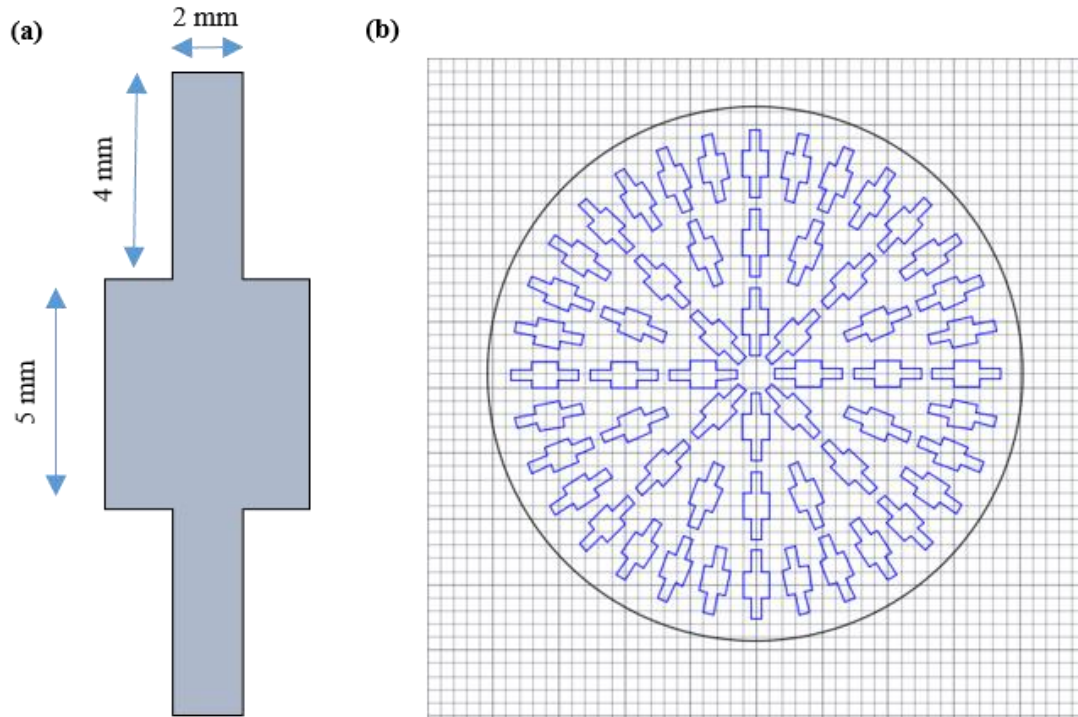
(a) Dimensions of the PDMS cantilever. (b) The laser engraving pattern is drawn using AutoCAD and printed to the laser engraver.
